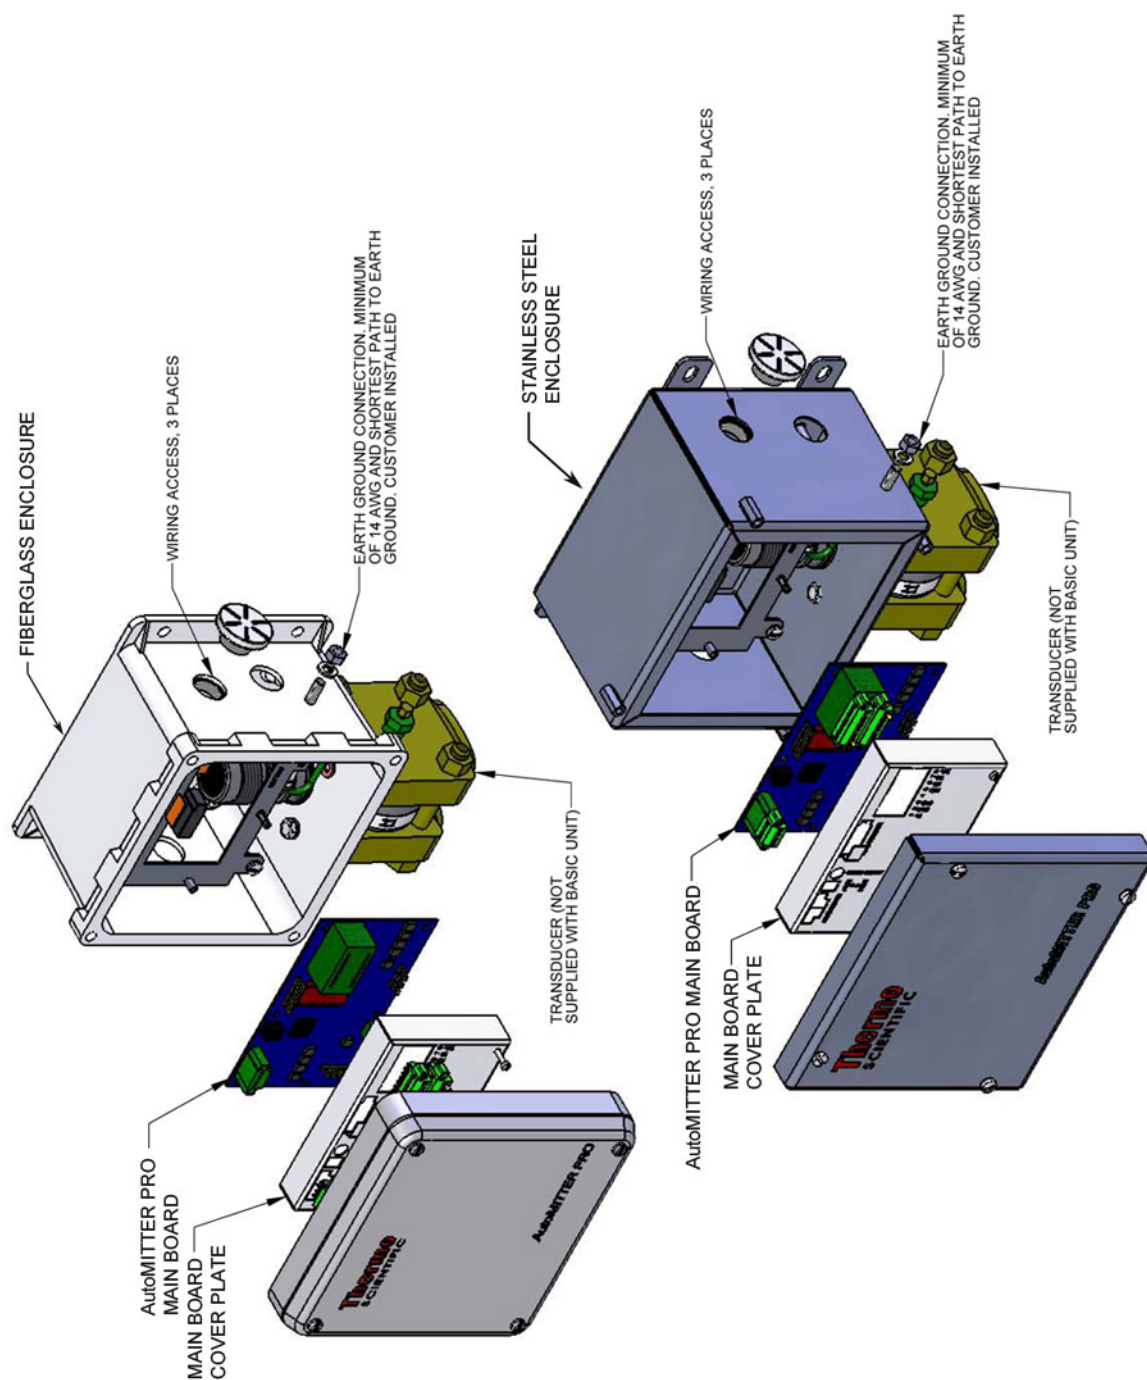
0-0497-516: AutoMITTER PRO general assembly drawing, ATEX (sheet 2 of 3)
